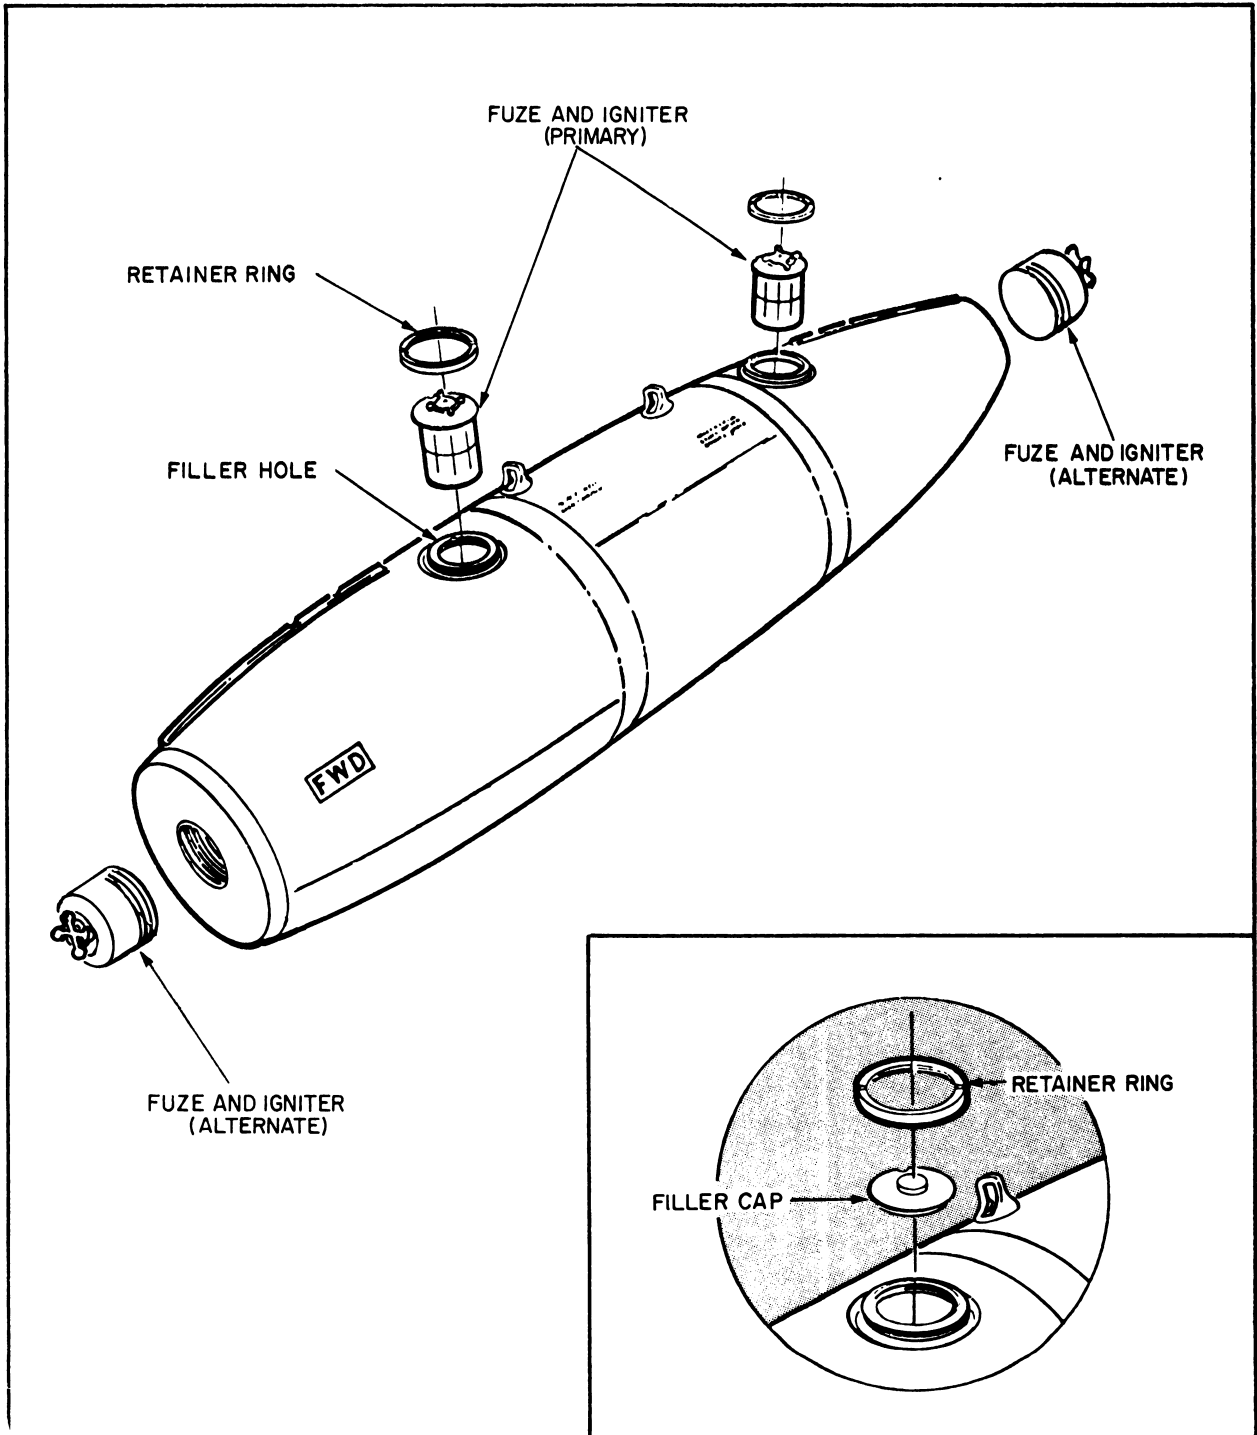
500-pound fire bomb Mk 77 Mod 4 (exploded view).
